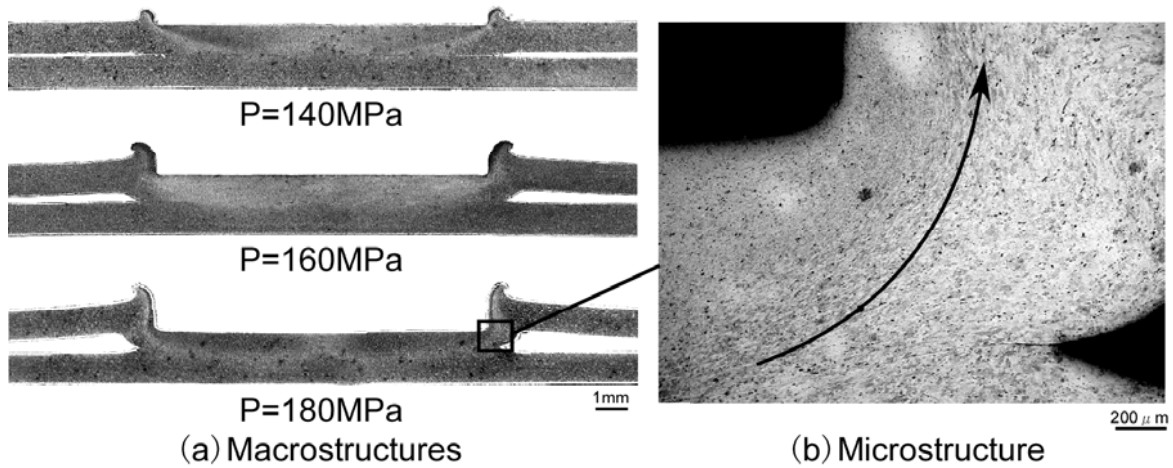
Macro and microstructures of friction spot weld joint. ($t=1.0s$)
